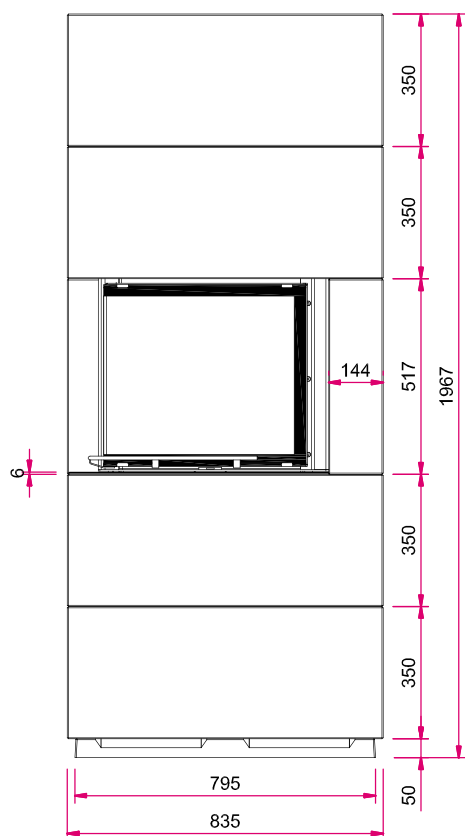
with 2nd base, H 350 mm | Surface finish: Camina concrete paint
